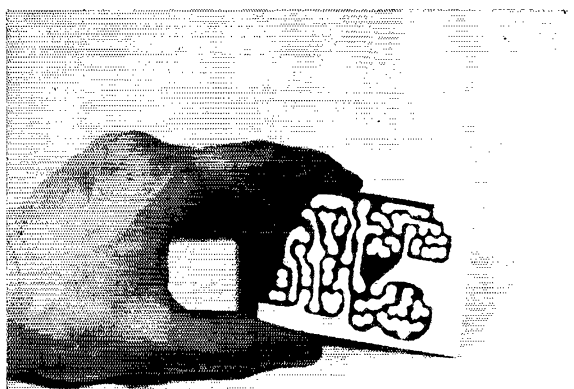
The etched p.c. board, ready for drilling and mounting parts.
